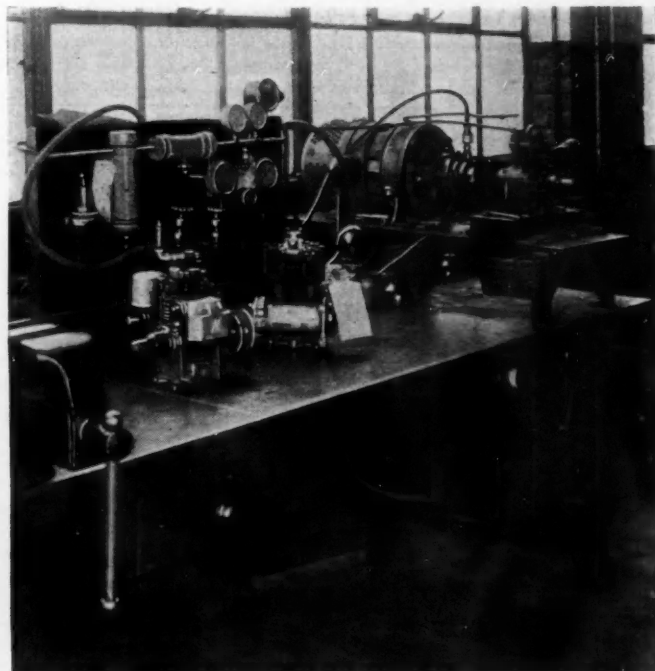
AIR-BRAKE AND COMPRESSOR SECTION OF THE MACHINE-SHOP
